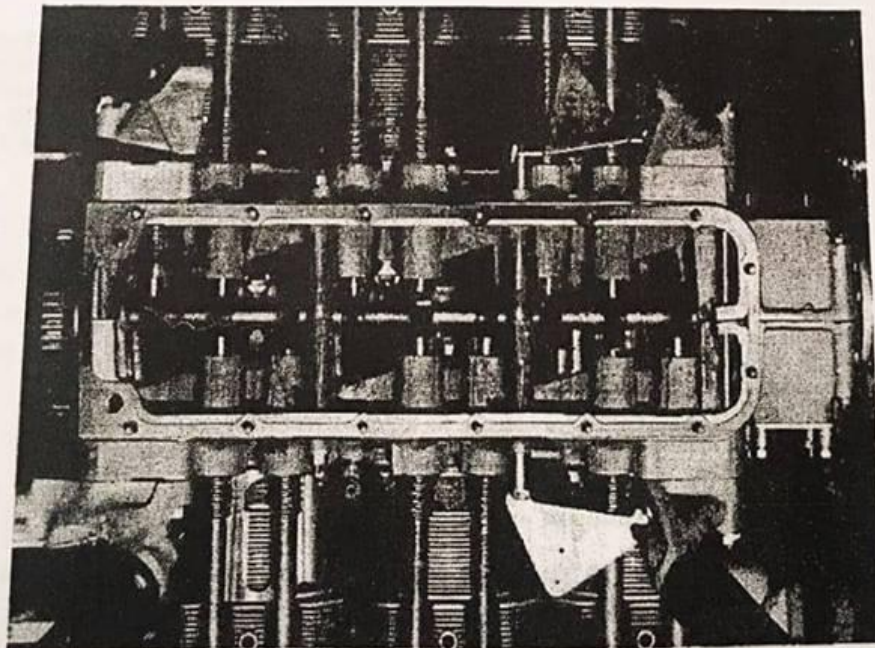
BOTTOM VIEW, VALVE MECHANISM.
